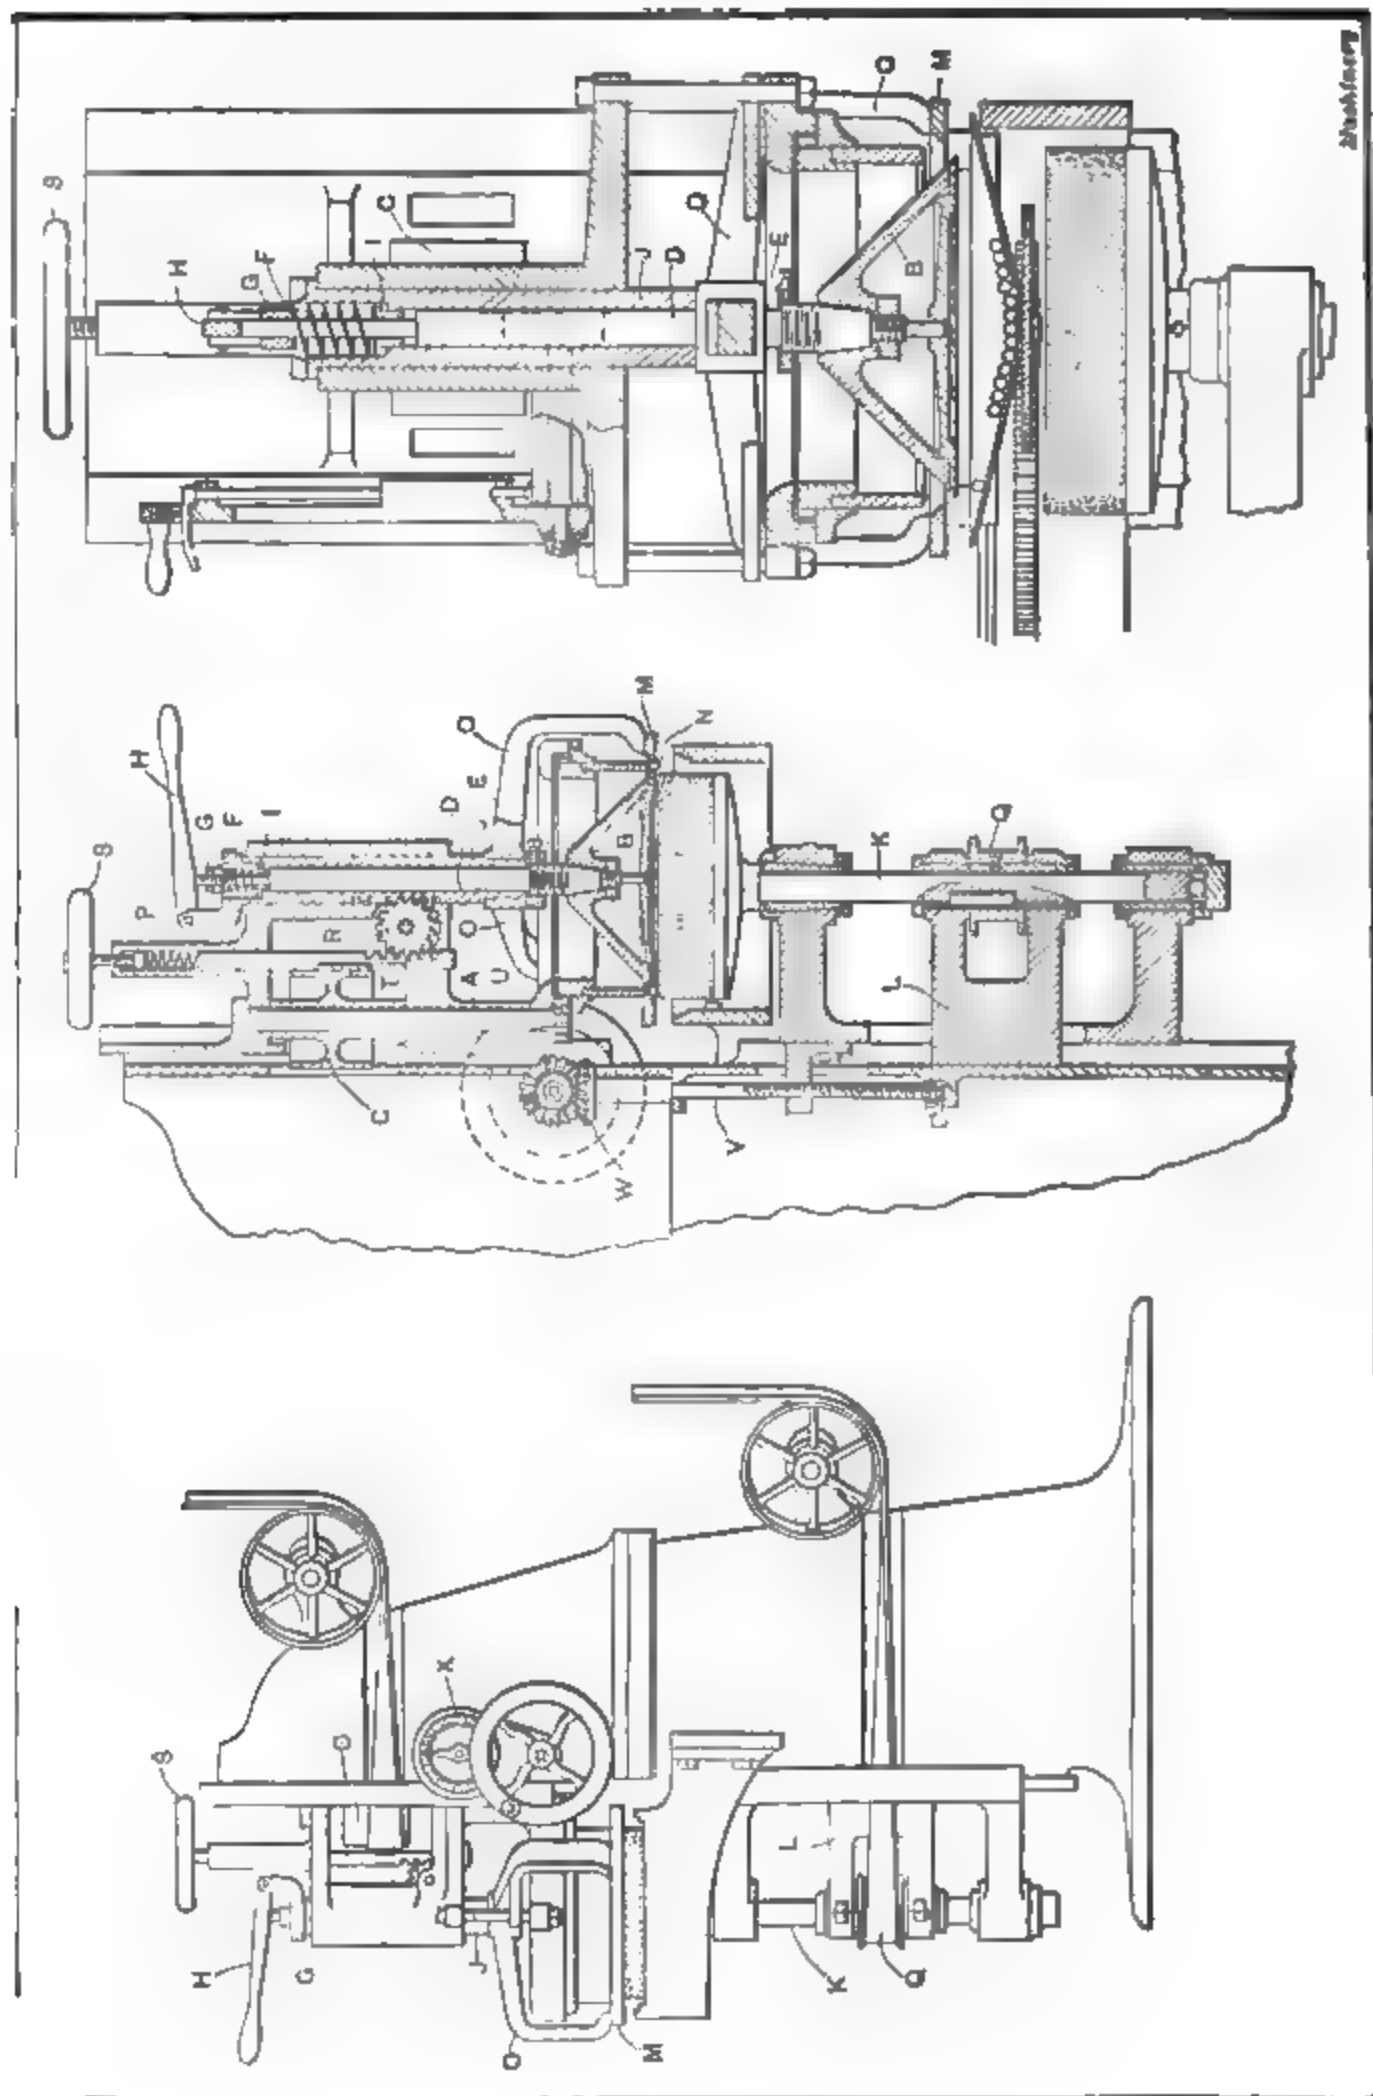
Robert H. Grant Dry Grinding Machine—U. S. Patent No. 539,019
